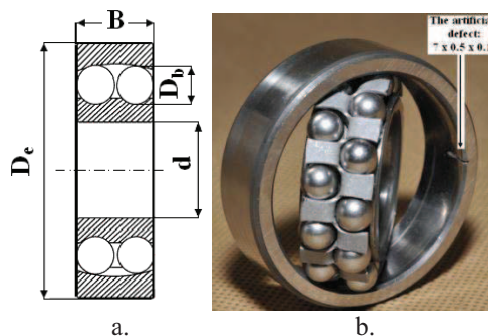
Self-aligning ball bearing with tapered bore, ZKL 1205K type: a. - technical drawing; b. - photo with location of the artificial defect on rolling bearing outer raceway
